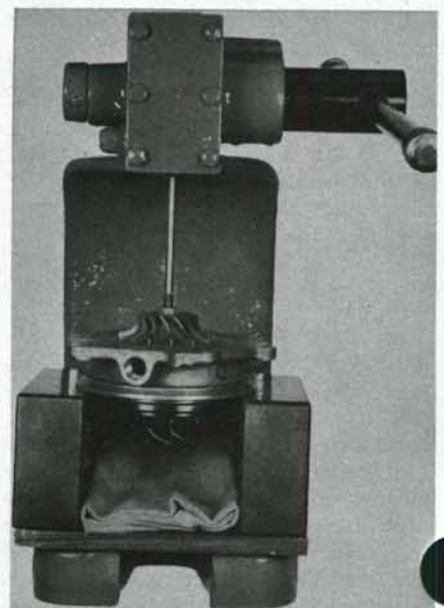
View showing method of removing early type impeller using special Kent-Moore tool.
